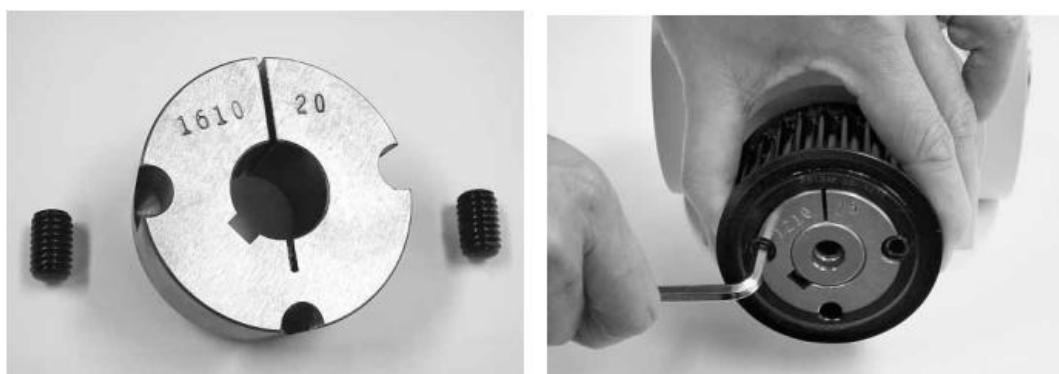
Taper Lock Bushing, grub screws and tightening of screws with a hex key wrench
